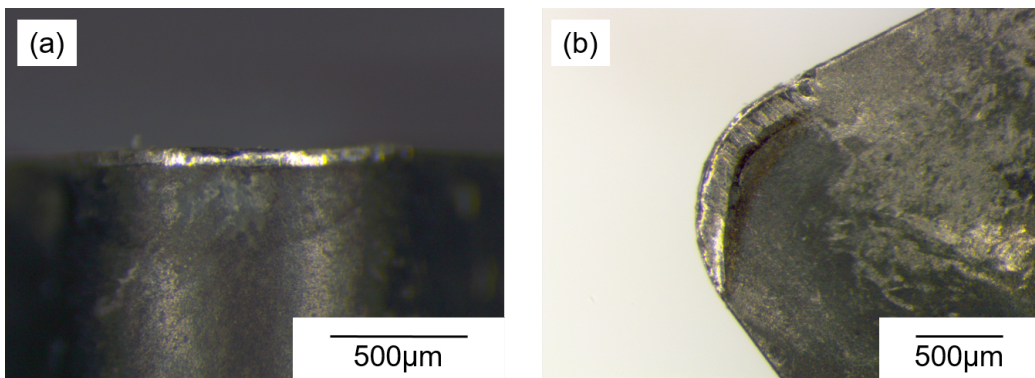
Microscope images showing the degree of tool wear after trial 2.1.3 on the as-HIP billet. Showing (a) the flank face and (b) the rake face.
